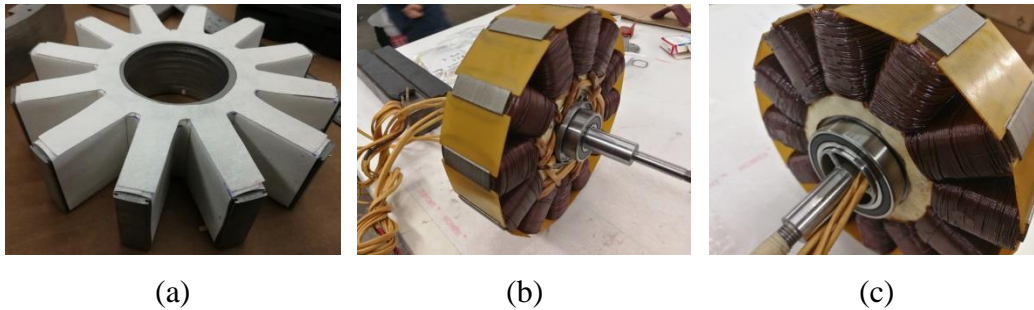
Manufactured stator assembly: (a) insulation; (b) side A; (c) side B.
